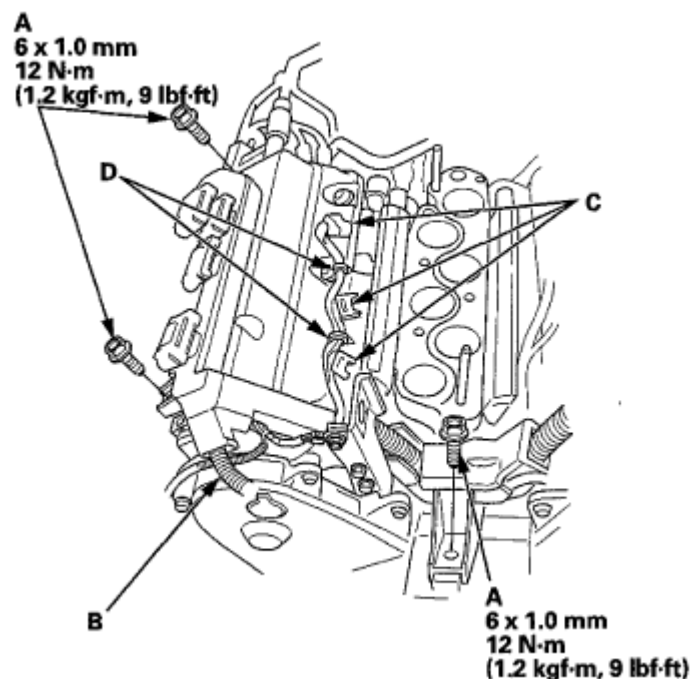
Identifying Injector Connectors, Harness Clamps, Harness And Harness Holder Mounting Bolts With Torque Specification
